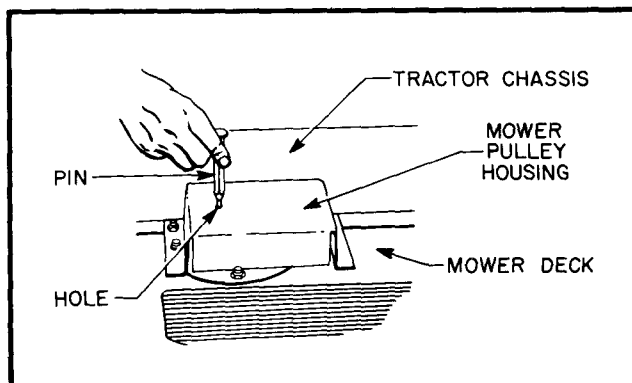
Locking Plate Pulley To Loosen Plate Nut
